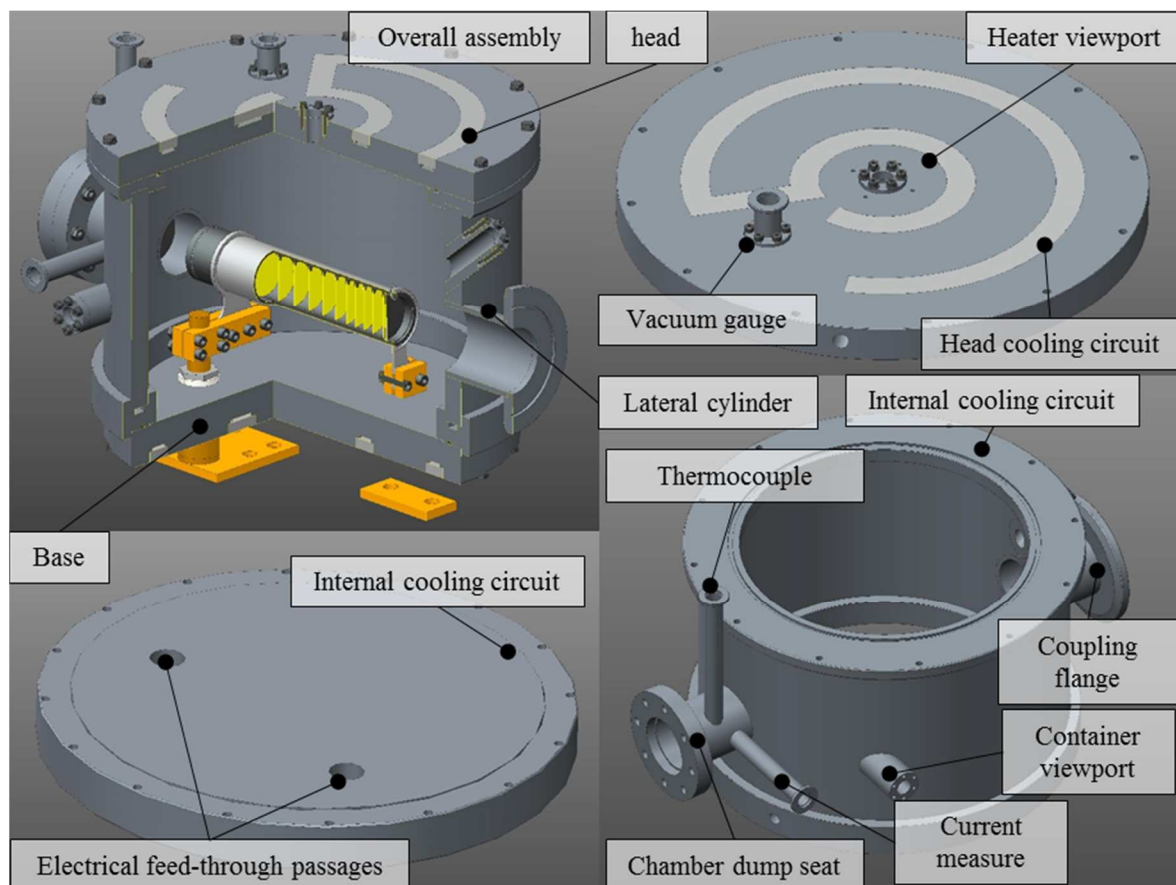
Mechanical design of the scattering chamber used for the test
